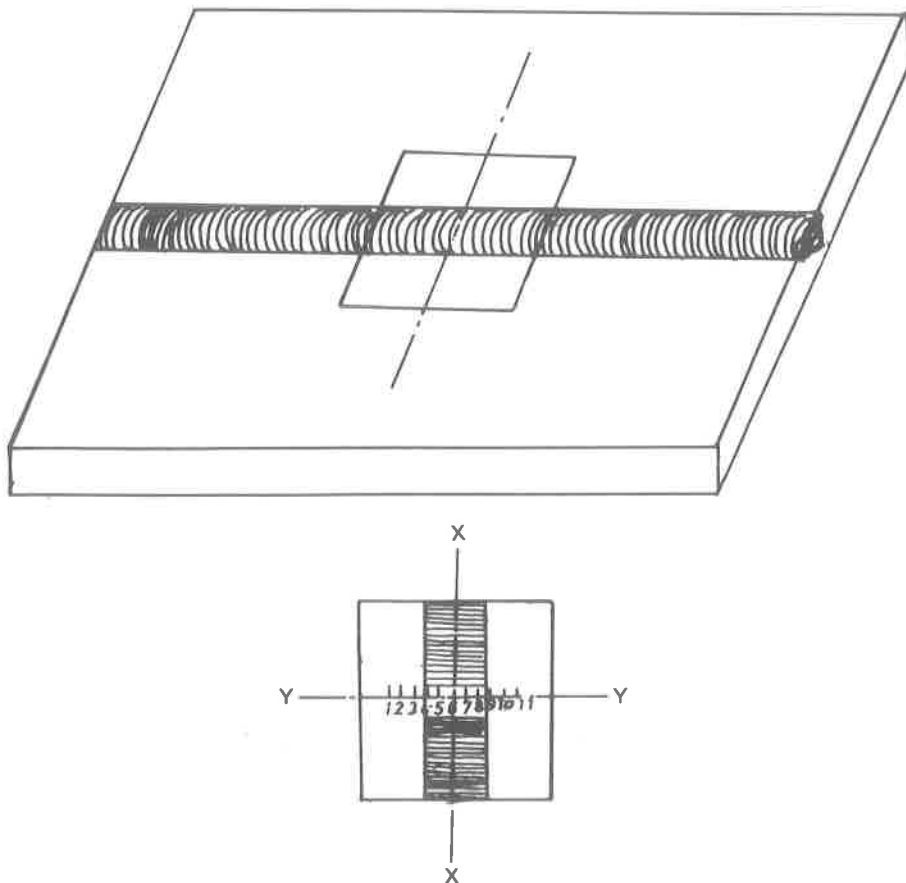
The divisions of the marked line of the polished sides of welded specimens
